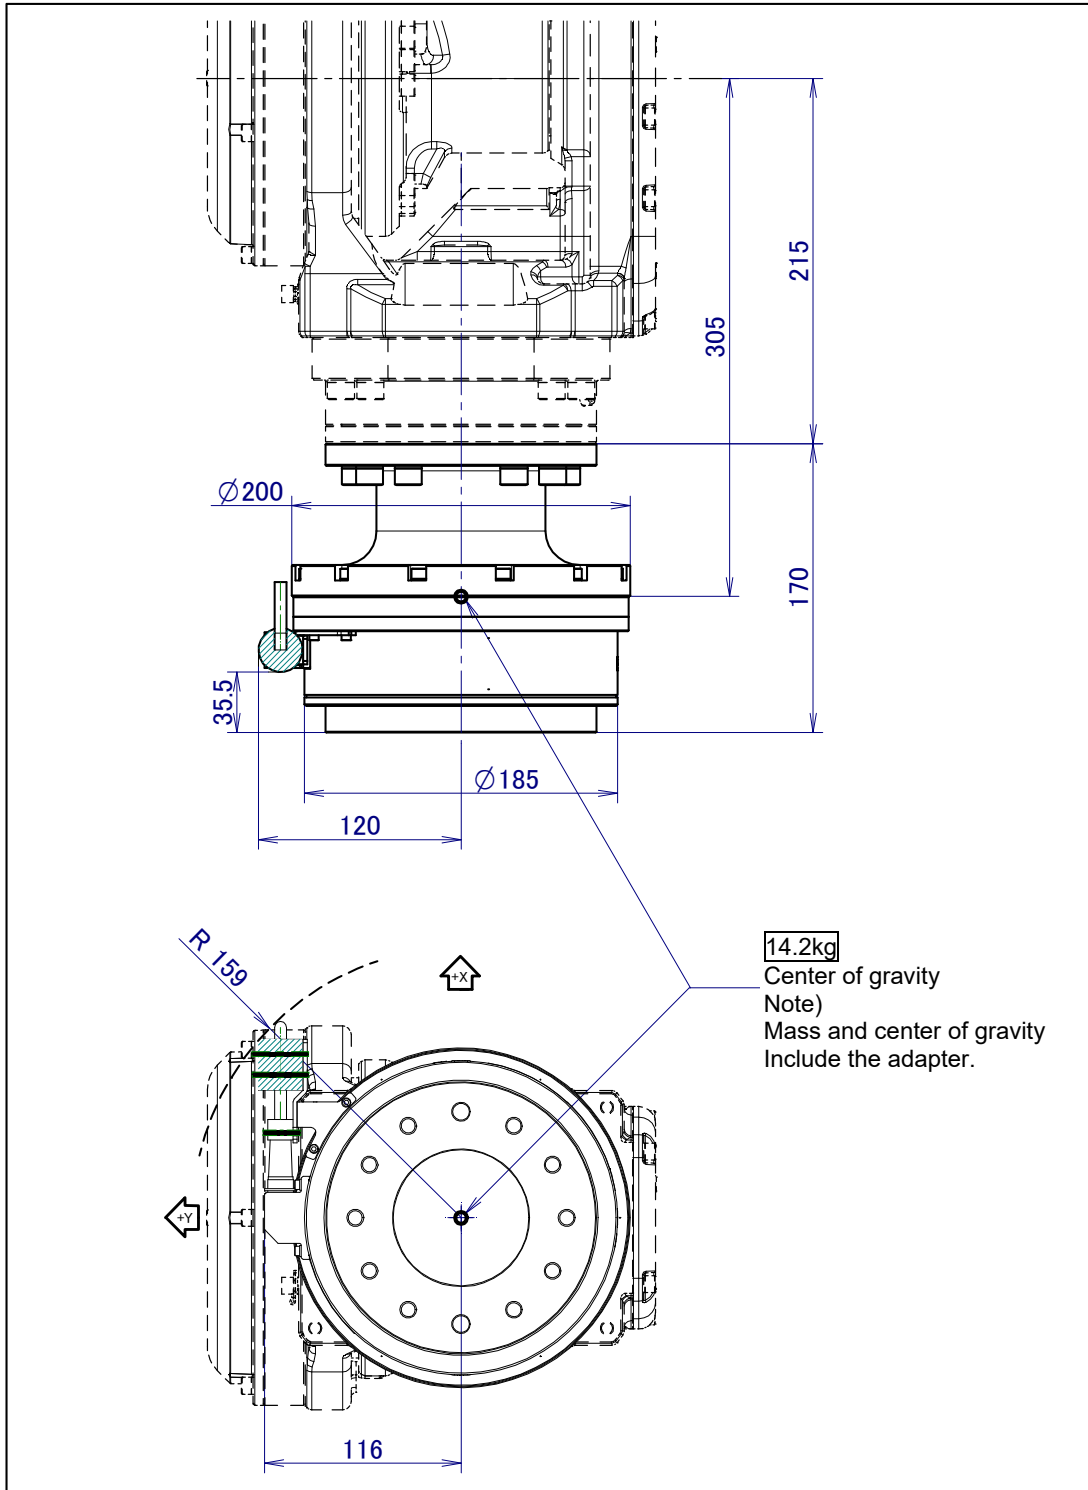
(g) External dimensions of the force sensor head
